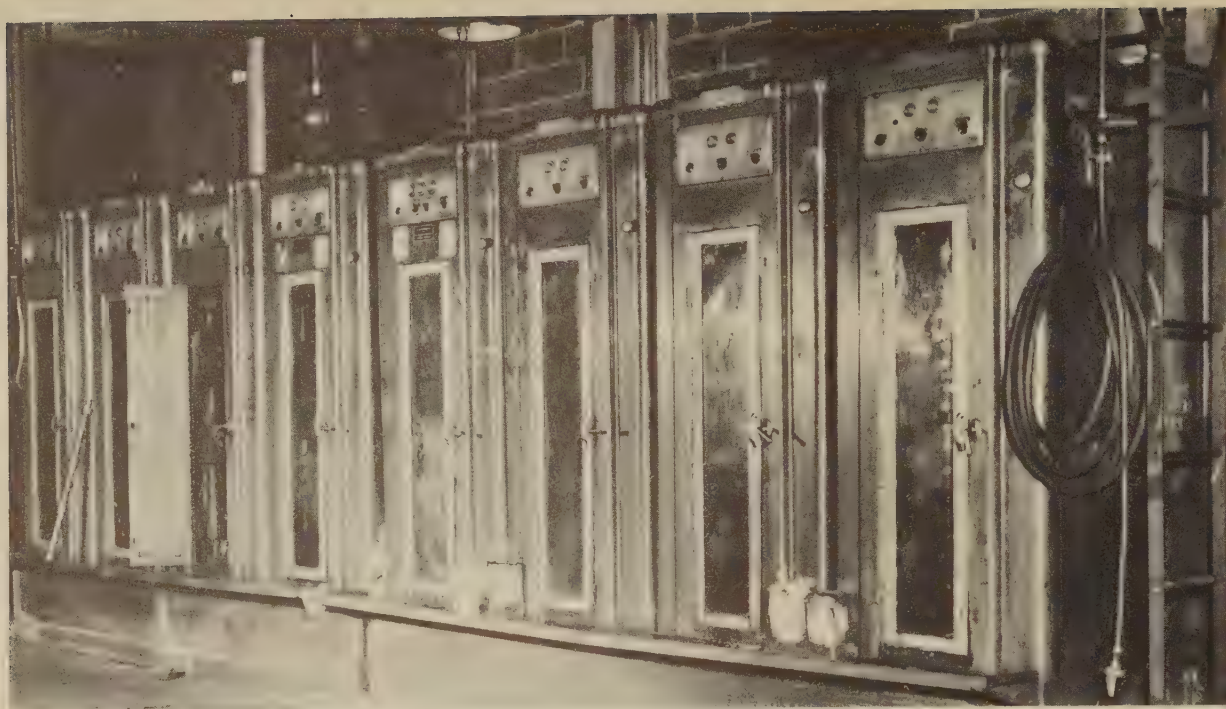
In this battery of eight induction hardening cabinets, camshaft cams and the gear is hardened automatically. The cycle starts when shafts are loaded and the glass doors are closed.
